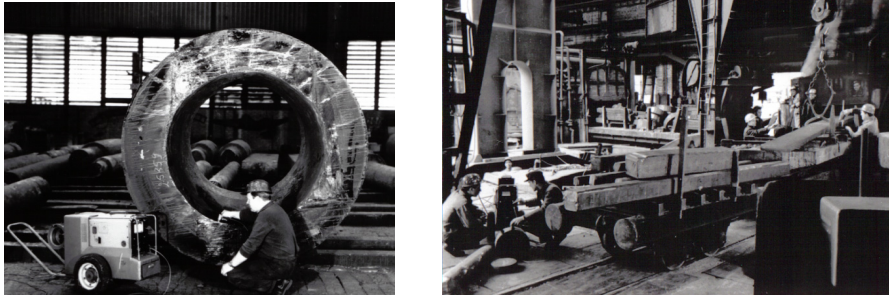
Manual ultrasonic inspections in the forging shop in the past [6].
